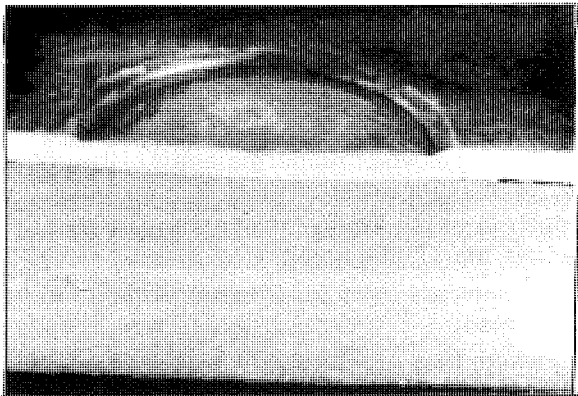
Section of an explosively spot welded brass/steel combination.
